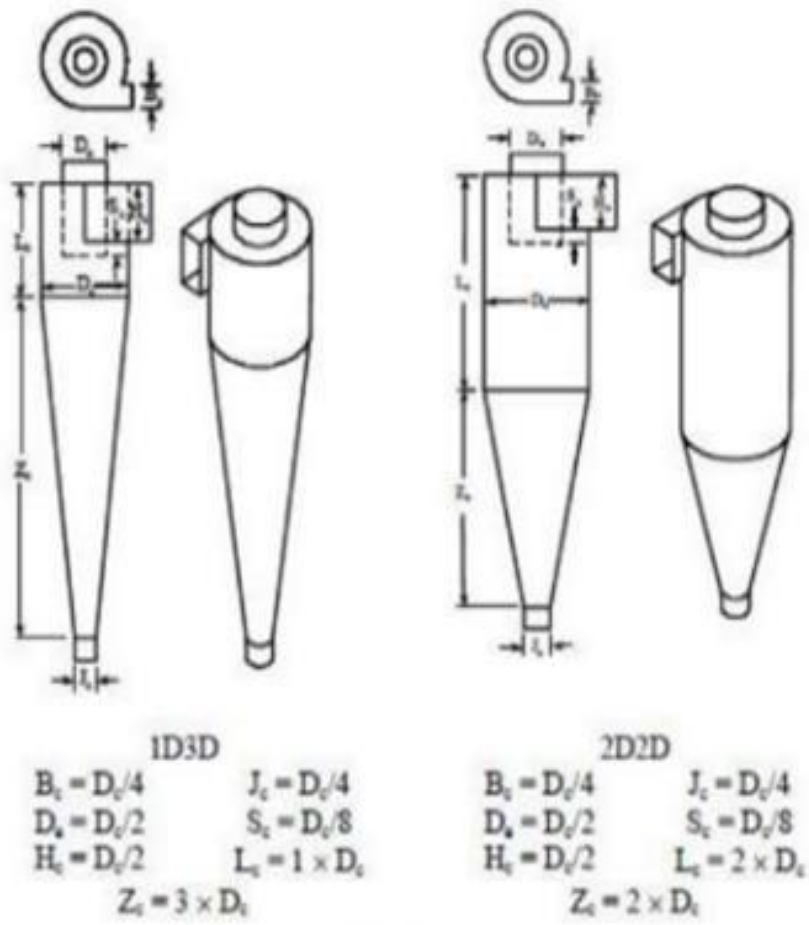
standard cyclone dimensions of 1D3D and 2D2D cyclone types
